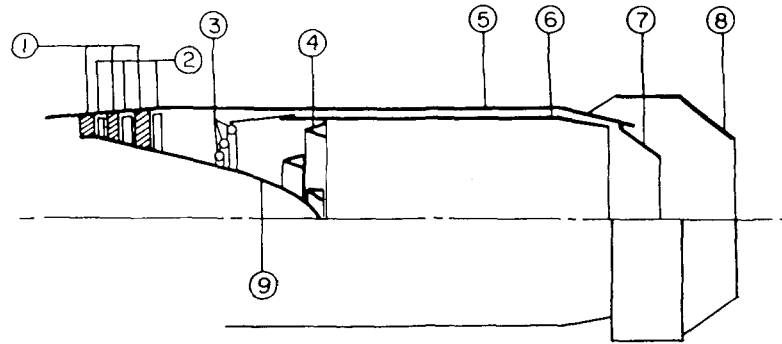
General Electric J-79 afterburner: (1) turbine nozzles, (2) turbine blades, (3) fuel injection rings, (4) three annular V-gutter flameholders, (5) afterburner case, (6) perforated liner, (7) and (8) primary and secondary nozzle flaps, and (9) diffuser inner cone.
